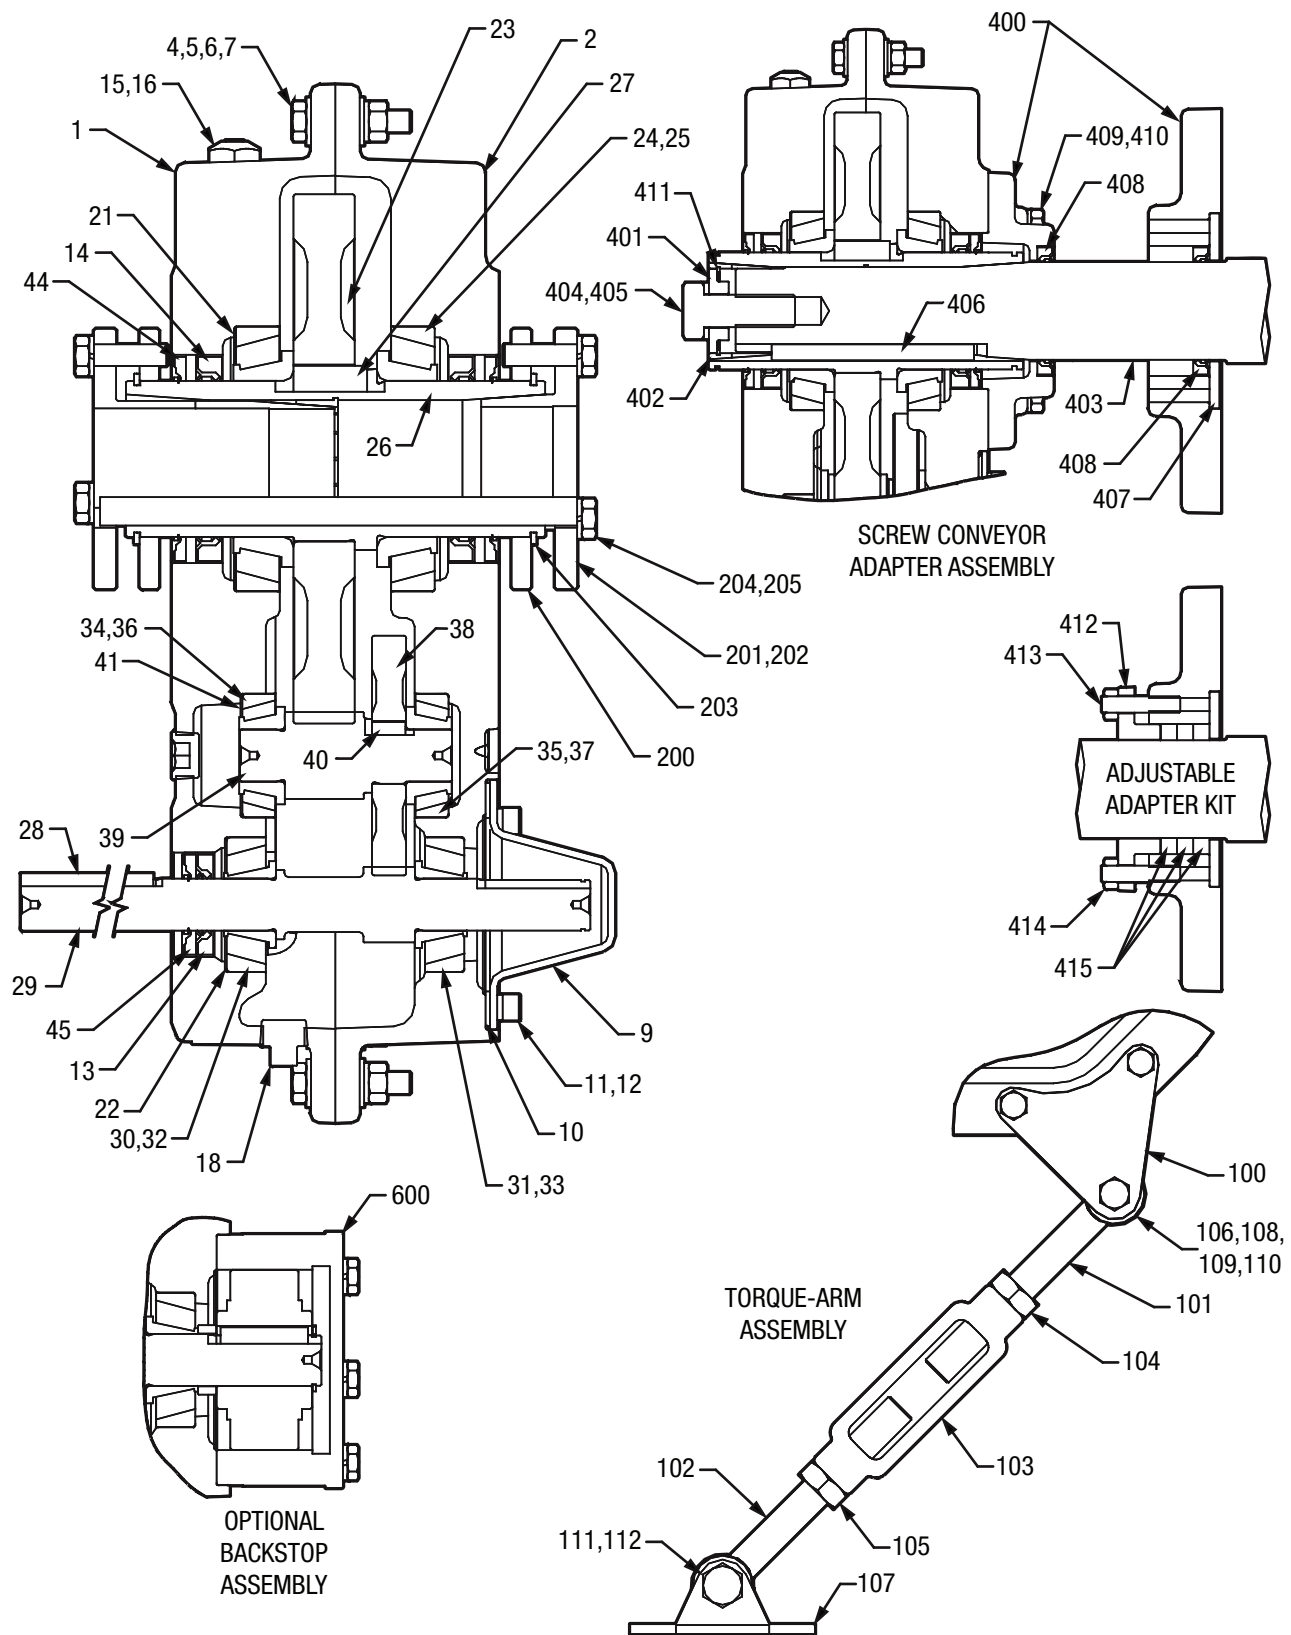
Parts for TA0107L thru TA12608H Taper Bushed Double Reduction Reducers
